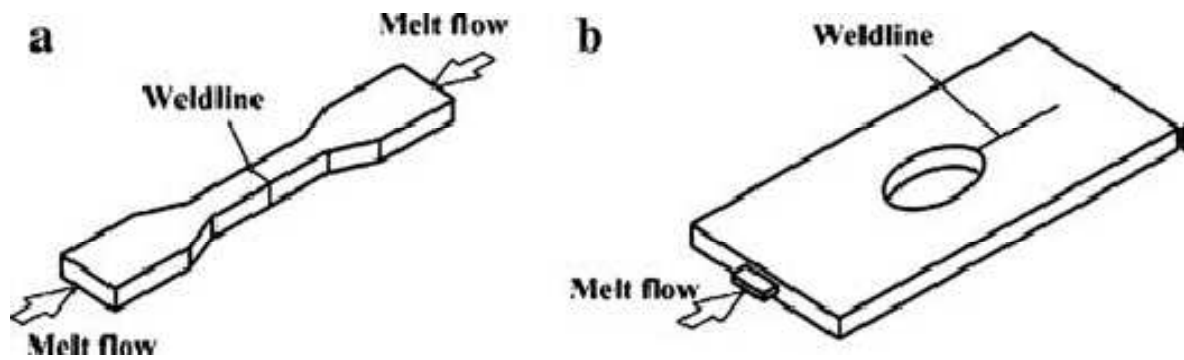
a) Cold weld line. b) Hot weld line.
